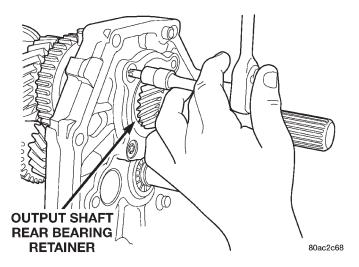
Remove Output Shaft Rear Bearing Retainer
